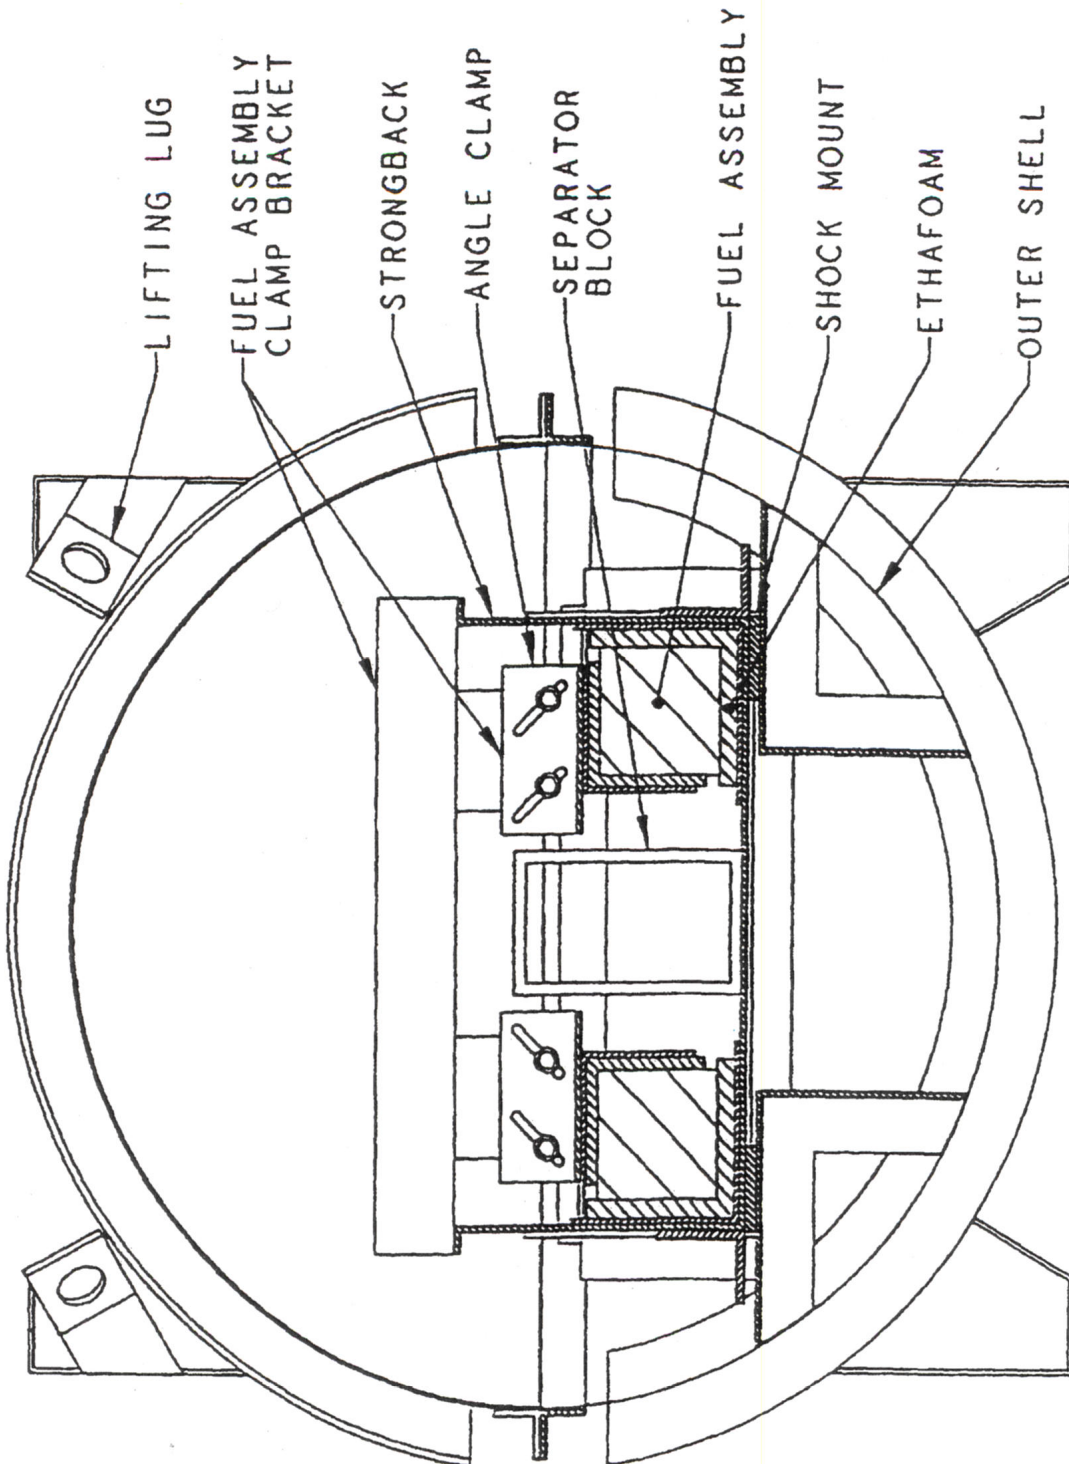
Typical unirradiated fuel package cross section with fuel assemblies
